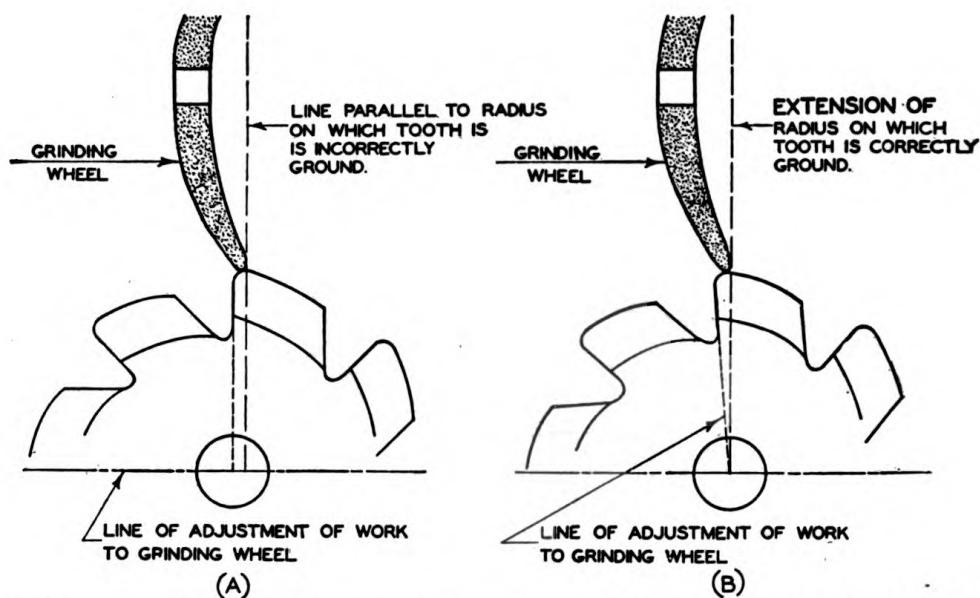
Grinding end teeth of a coarse tooth end mill.
